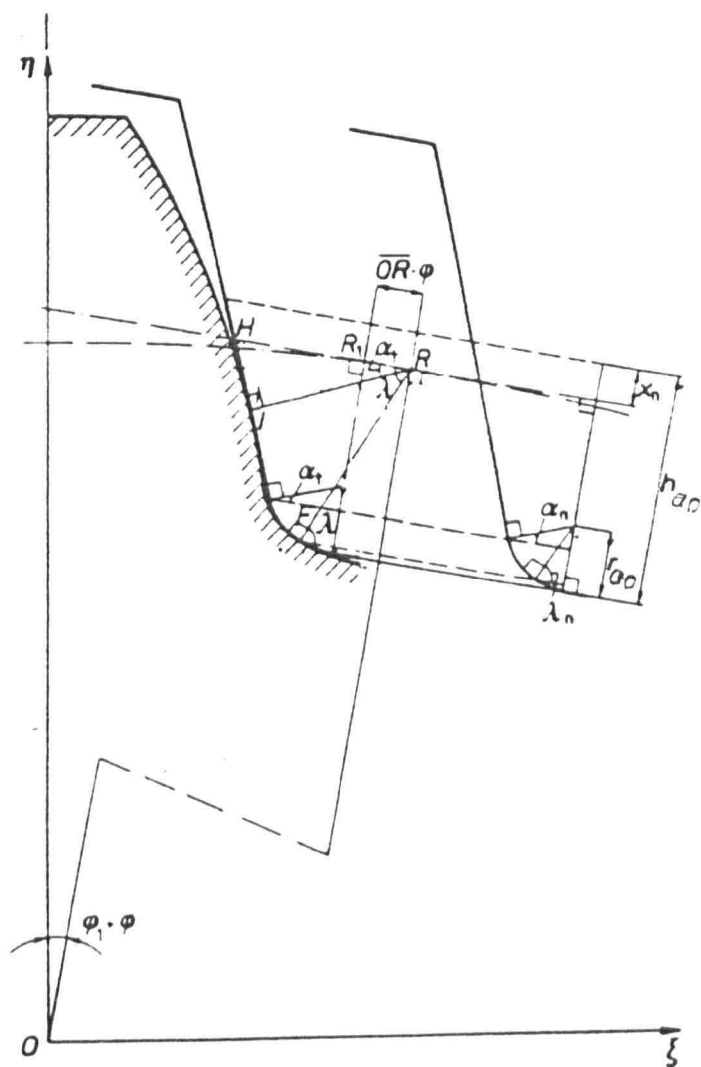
A.3 Gear Tooth Generated by a Rack Tool
